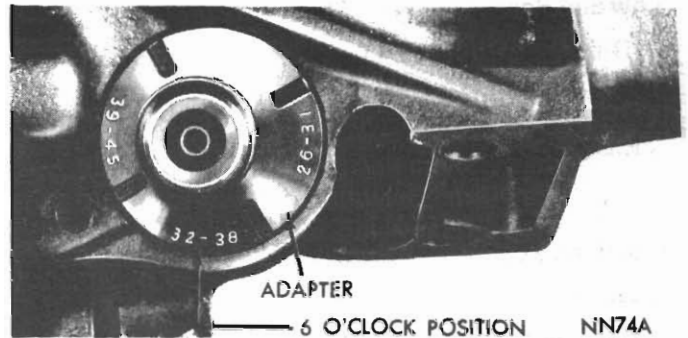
Speedometer pinion and adapter installed (Retainer removed for view)
